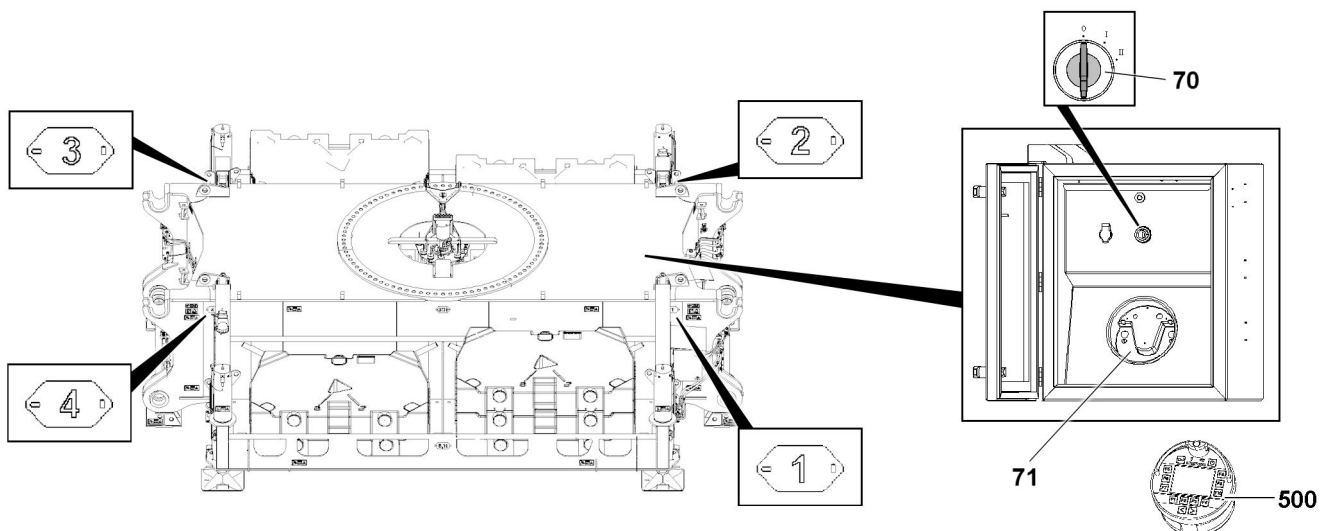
Radio remote control operation: Crawler travel gear operating and control instruments
